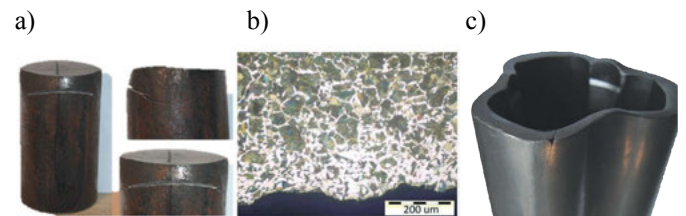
A view of: a) fractured preforms, b) XC45 steel structure, surface layer and c) a forging formed from a fractured preform [8]
